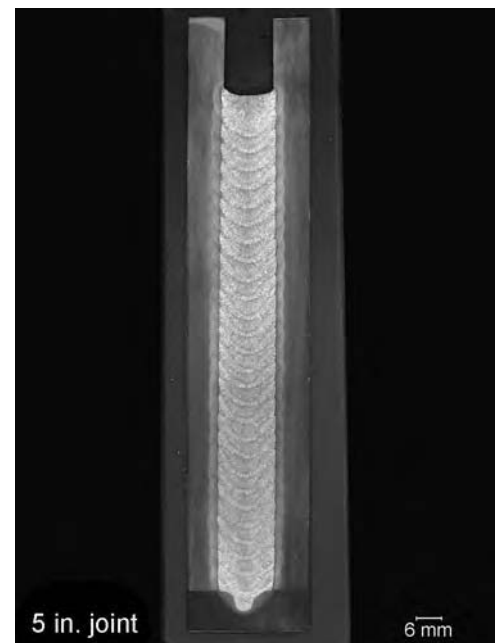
Narrow-groove gas metal arc welding deposit. Courtesy of Edison Welding Institute
